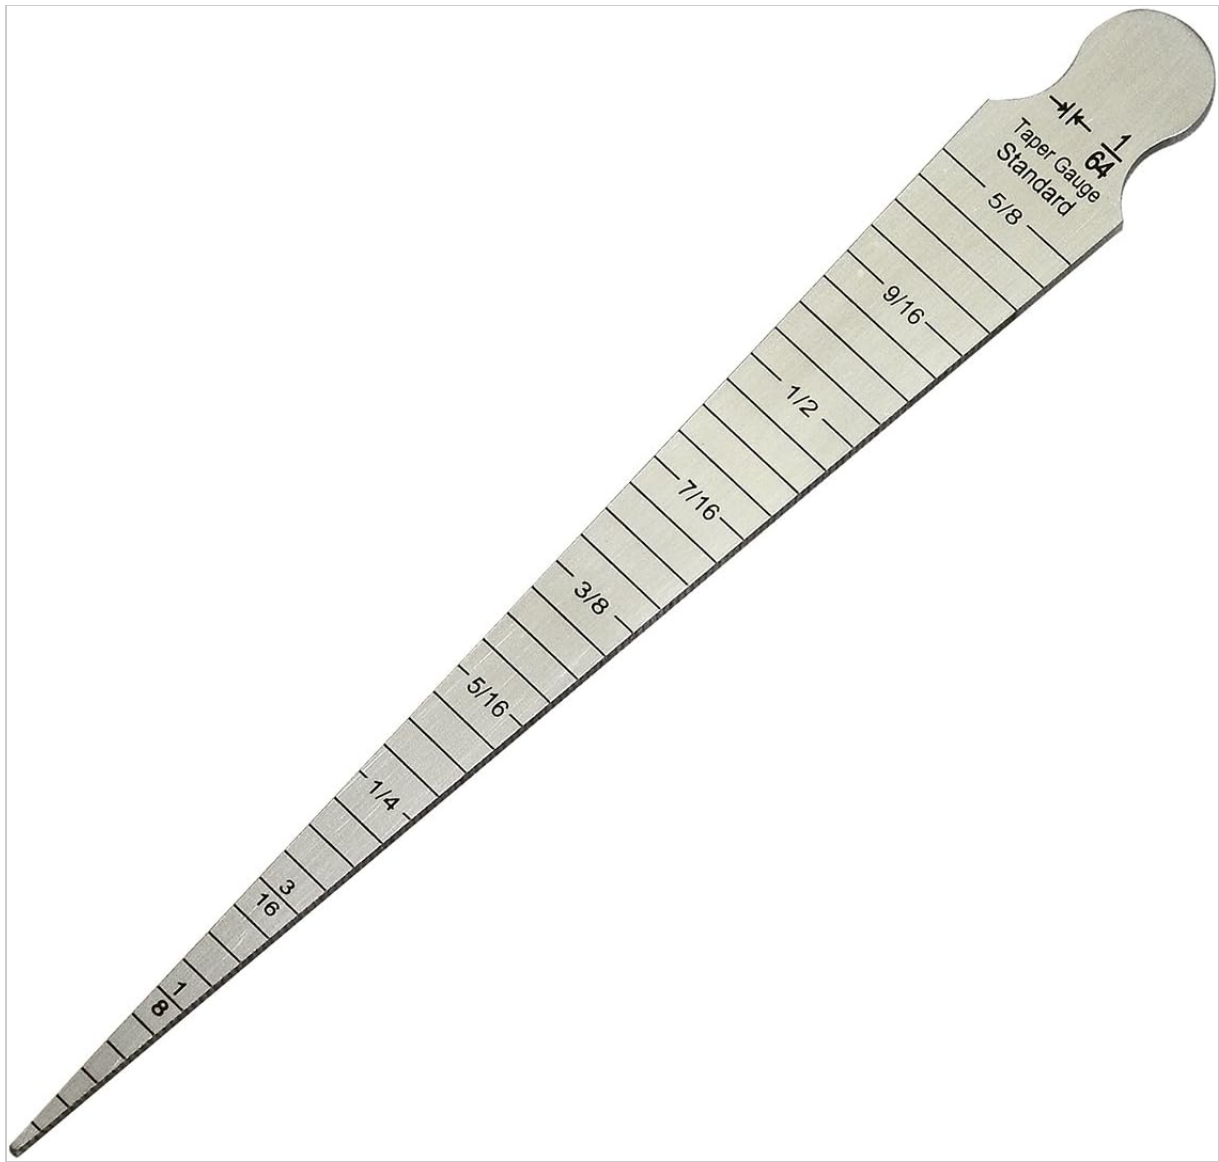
The RIVERWELD Taper Welding Gauge showing its imperial (inch) measurement scale.
